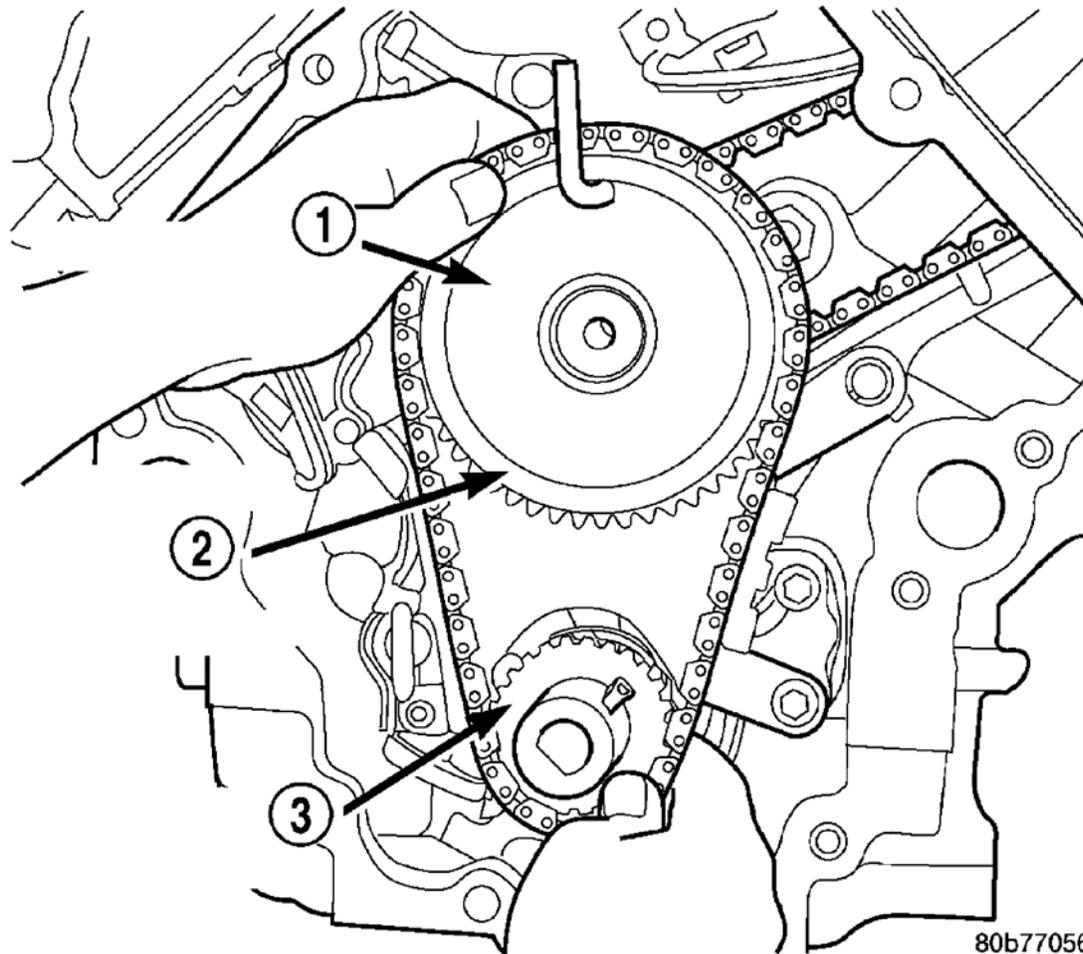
Identifying Crankshaft Gear, Primary Chain Idler Sprocket & Special Tool
